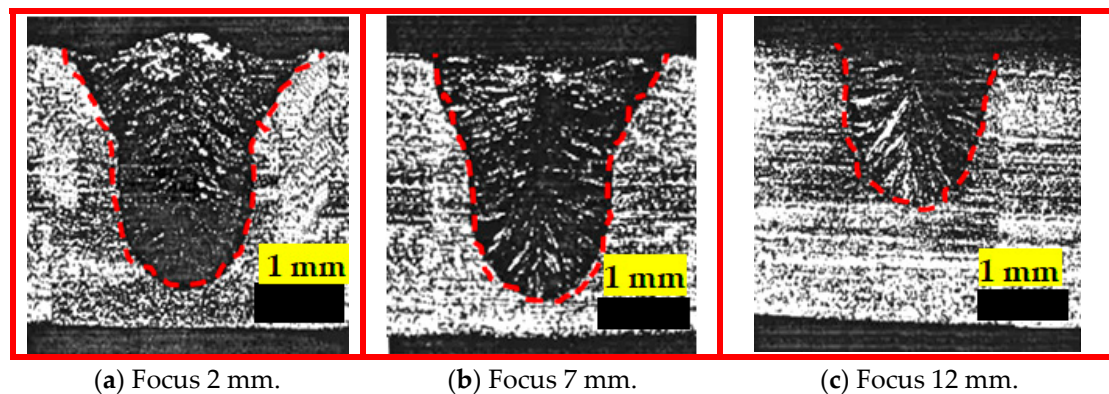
Effect of focus point on 304 LS laser weld carried out with a power of 3.674 kw, a welding of speed $2.450 \text{ m} \cdot \text{min}^{-1}$, and a shield gas comprising 70% He + 30% Ar.
